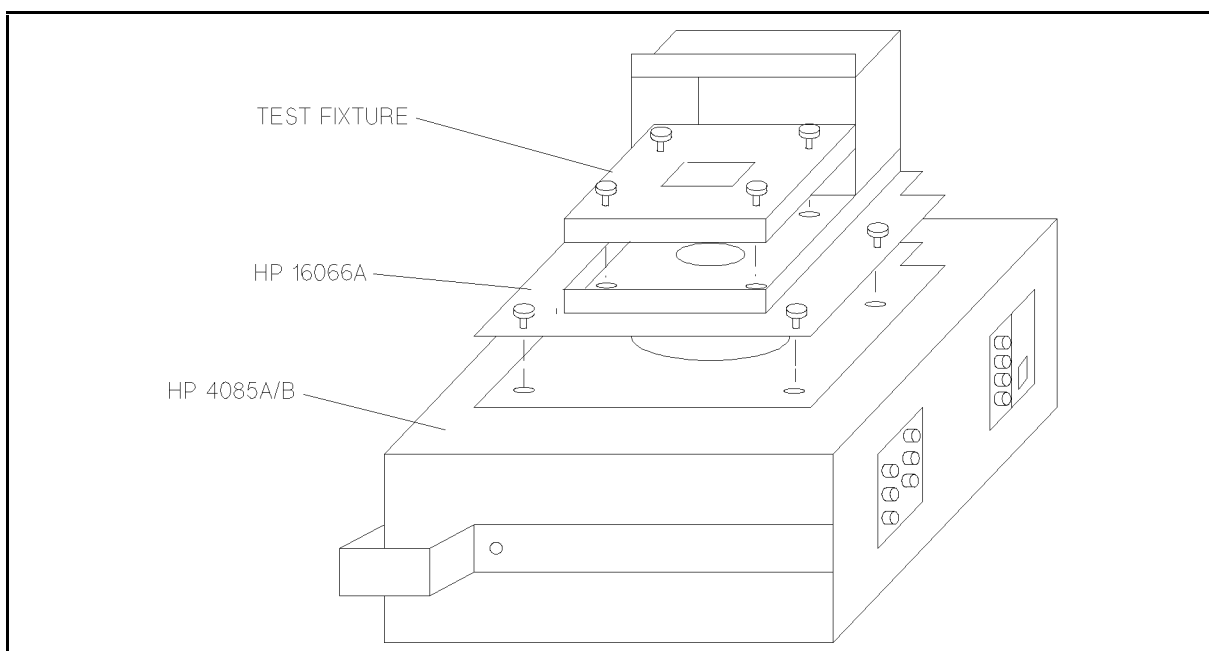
Test Fixture Adapter (for 48-pin SWMs)
